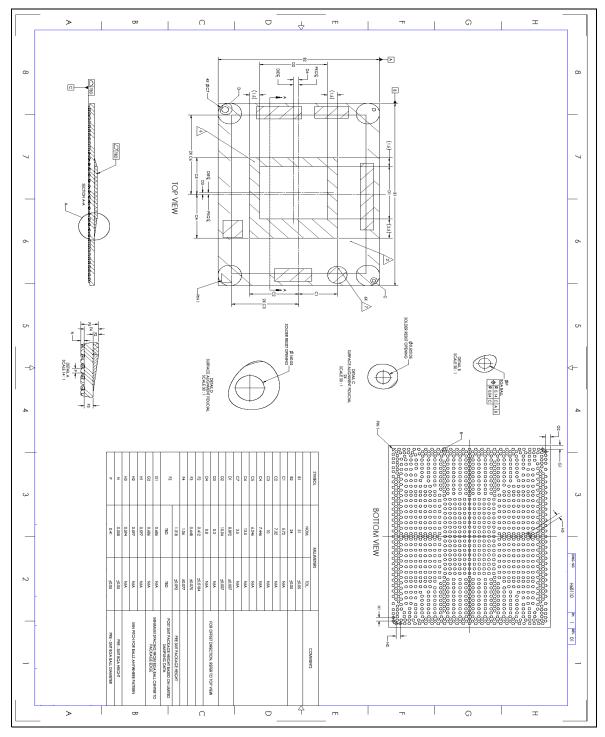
Package Mechanical Drawing—Part 2 of 3
